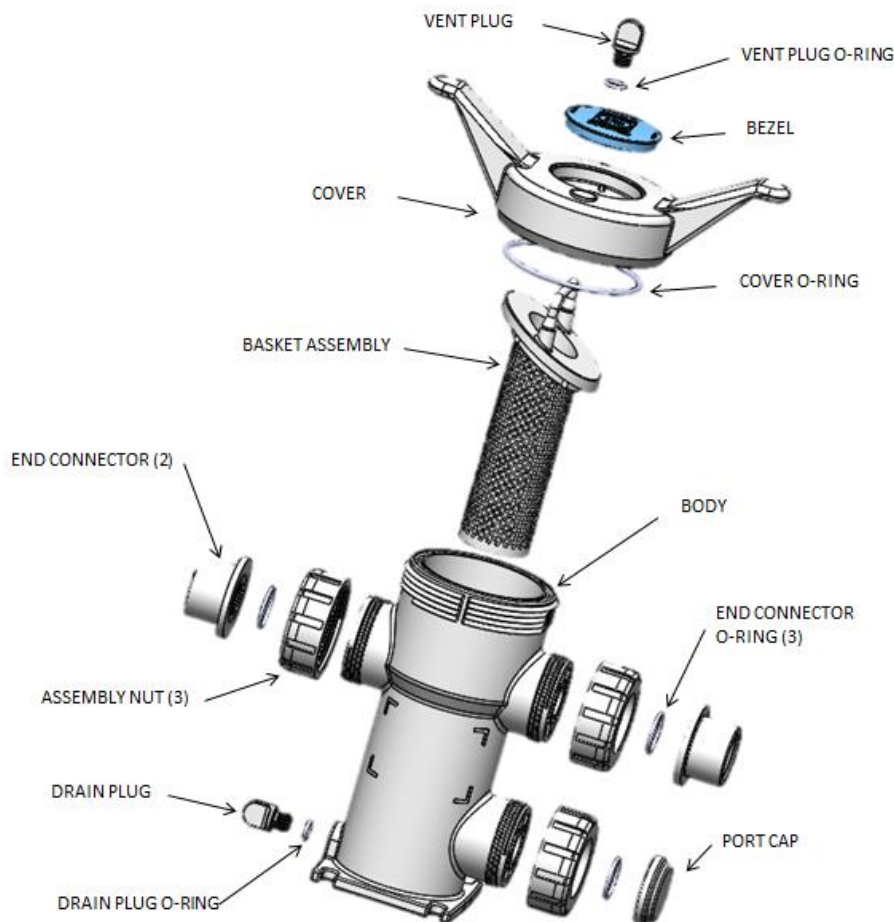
Exploded View of PVDF SB Series Strainer Basket Assembly.
